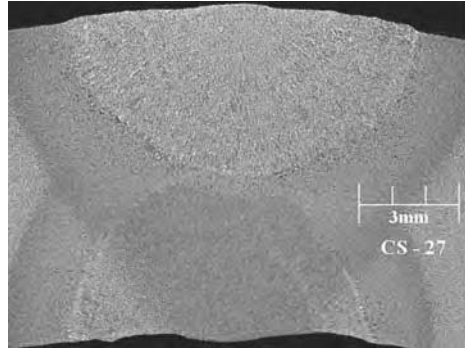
Two-sided weld in a steel turbine barrel (prior to machining operation). Courtesy of the Edison Welding Institute
